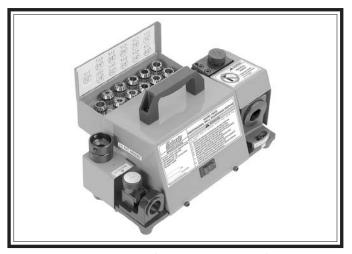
H8203 Professional Drill Bit Sharpening Machine.
